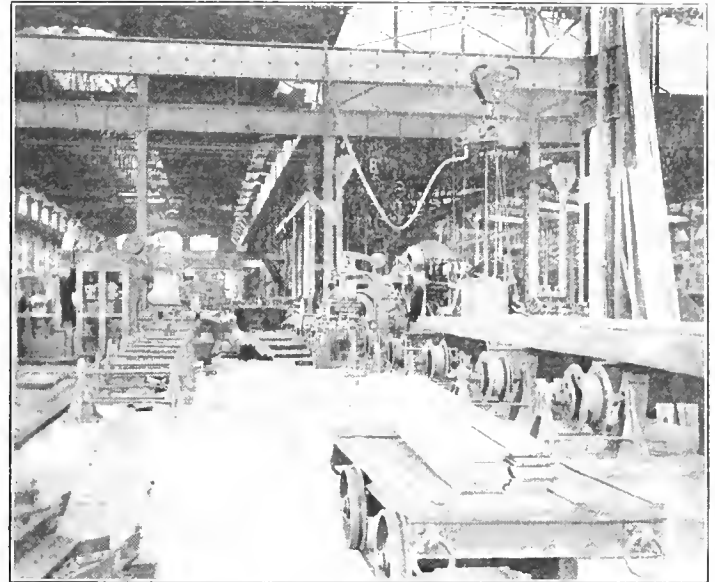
Punch for Handling Steel Car Z Bar Sections.
